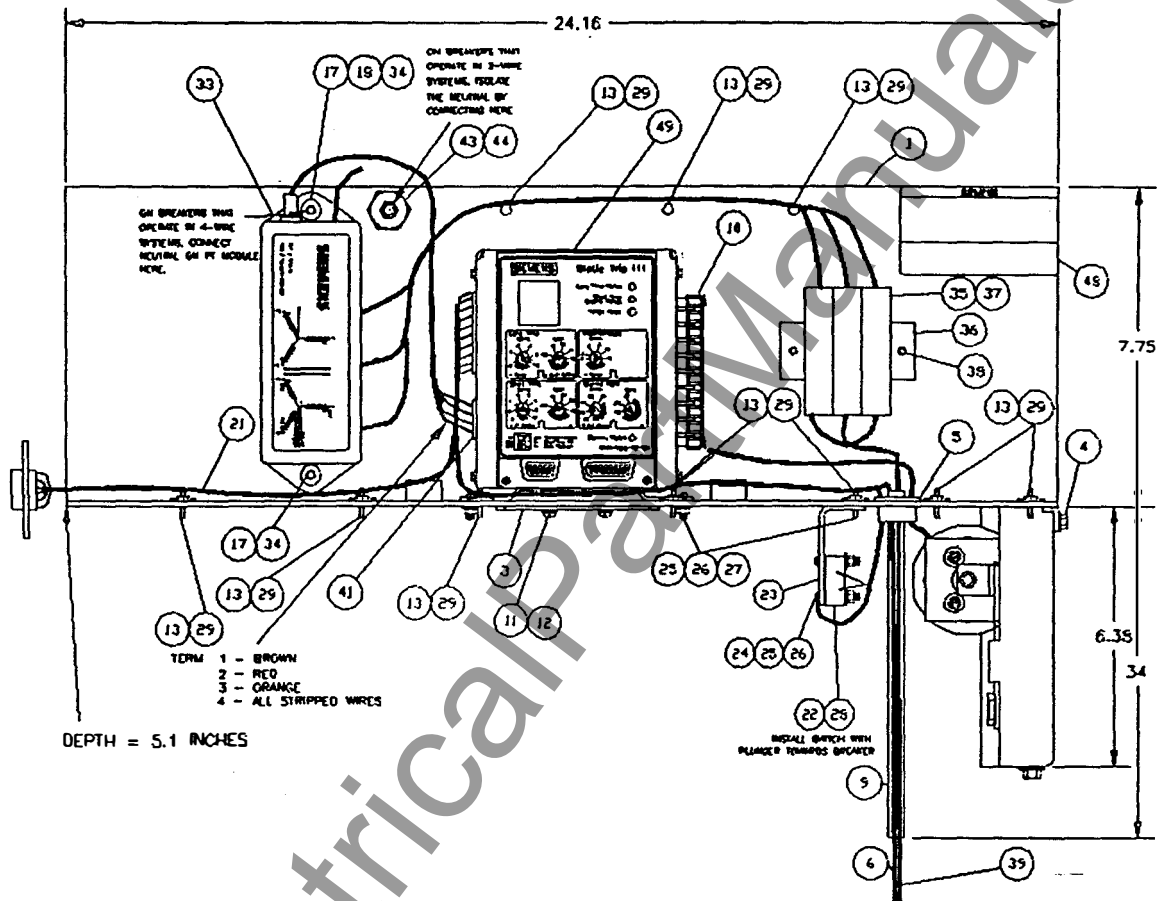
DB-100 Kit Bill-of-Material - p/n 18-824-956-5xx
